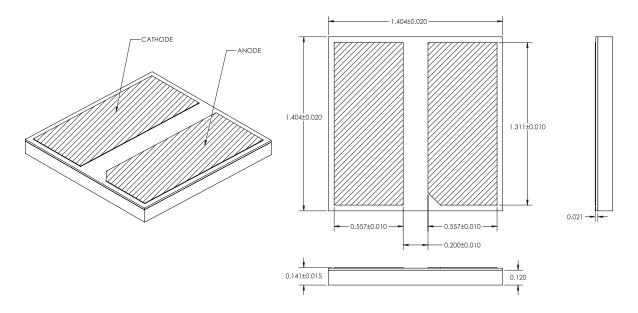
Mechanical dimensions for LUXEON UV FC2.
